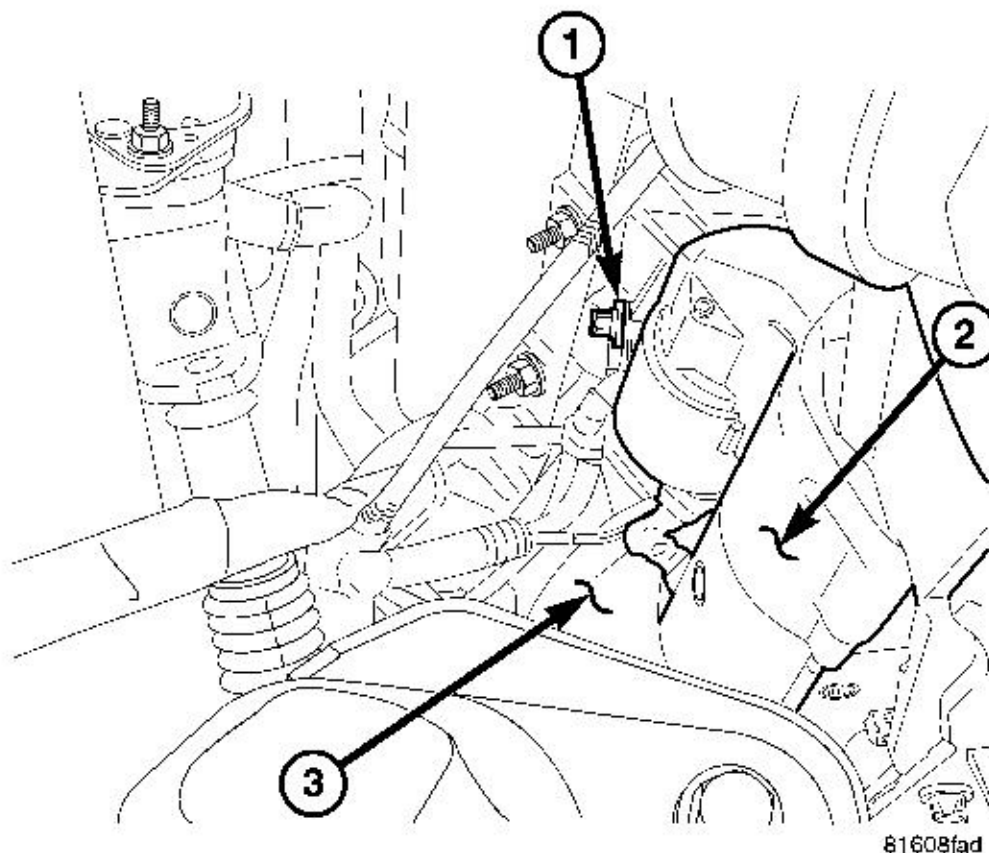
Engine Wiring Harness Ground, Starter & Left Engine Mount
